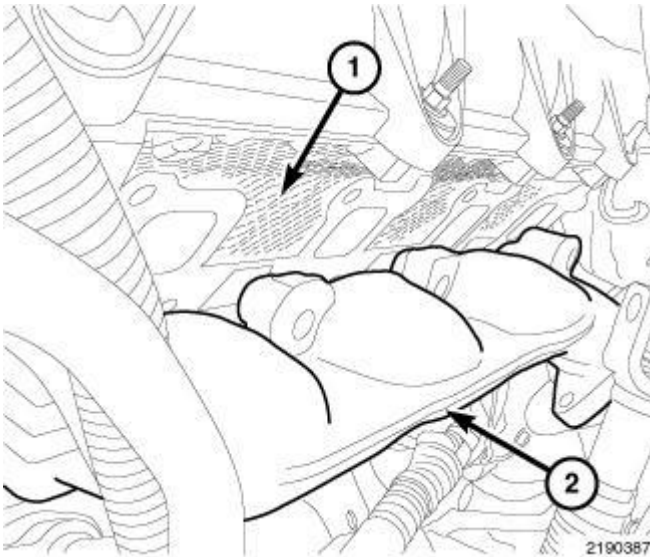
Exhaust Manifold & Gasket From Front Of Vehicle
